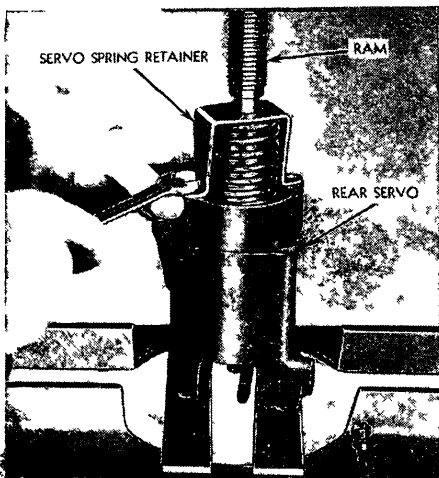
To disassemble rear servo, place in press and bring ram down to rest on spring retainer. Unfasten retainer bolts and release press slowly until springs are free
